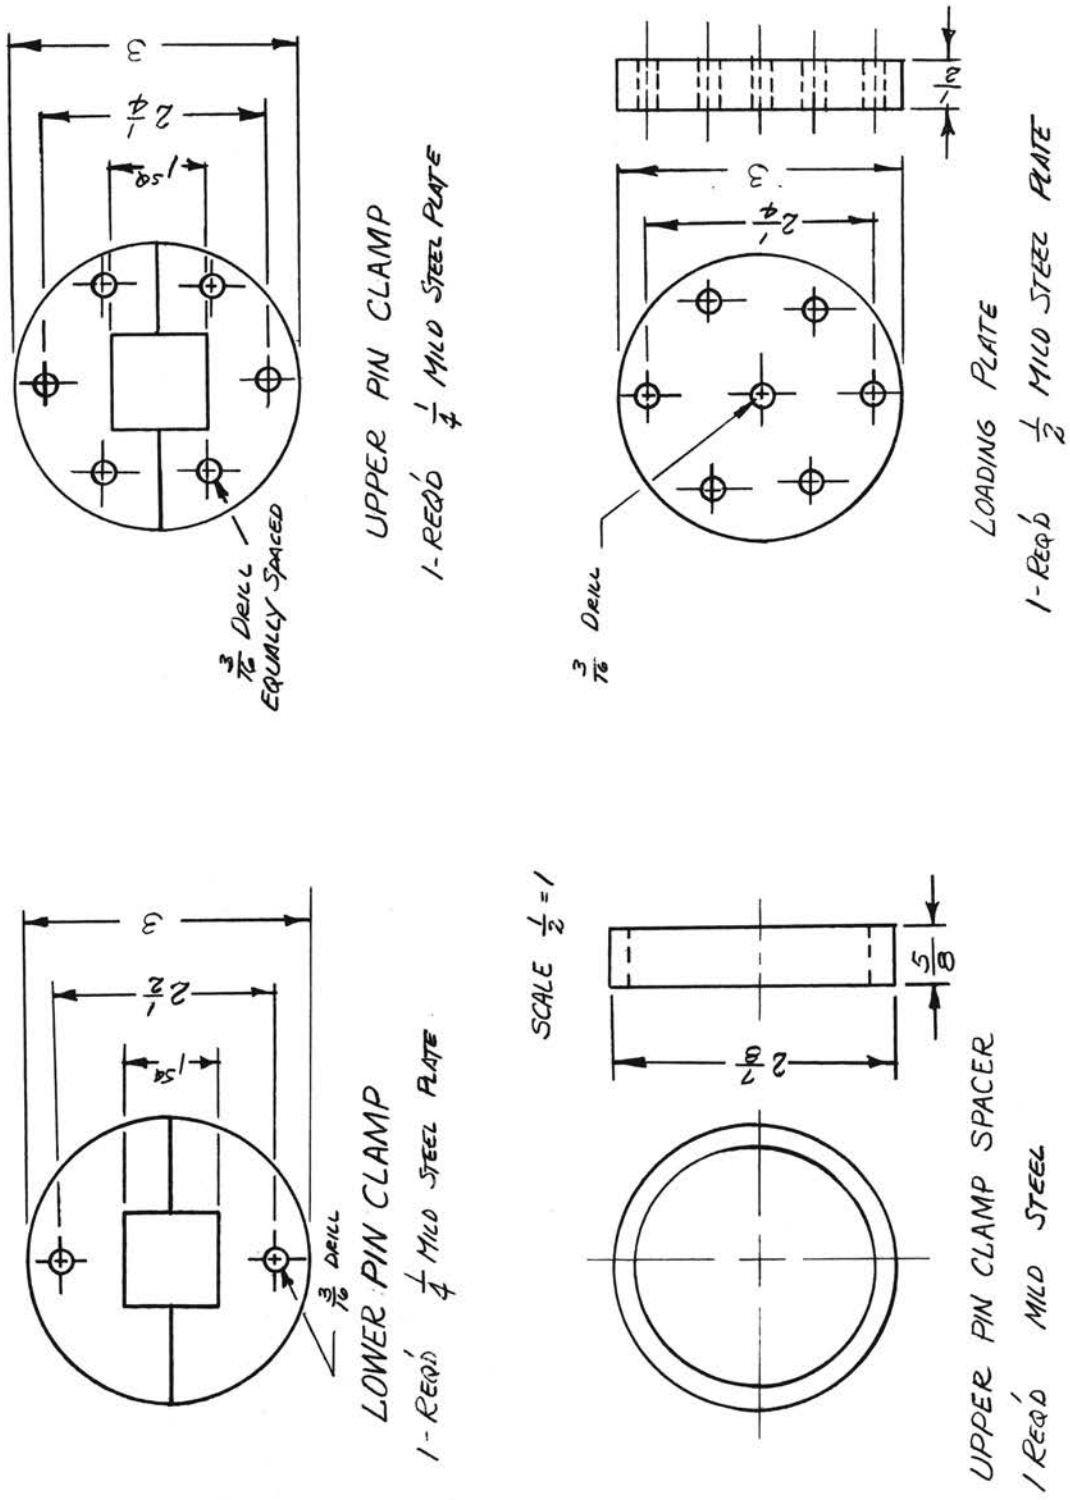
Details of Loading Frame Components, Sheet 1 of 3
